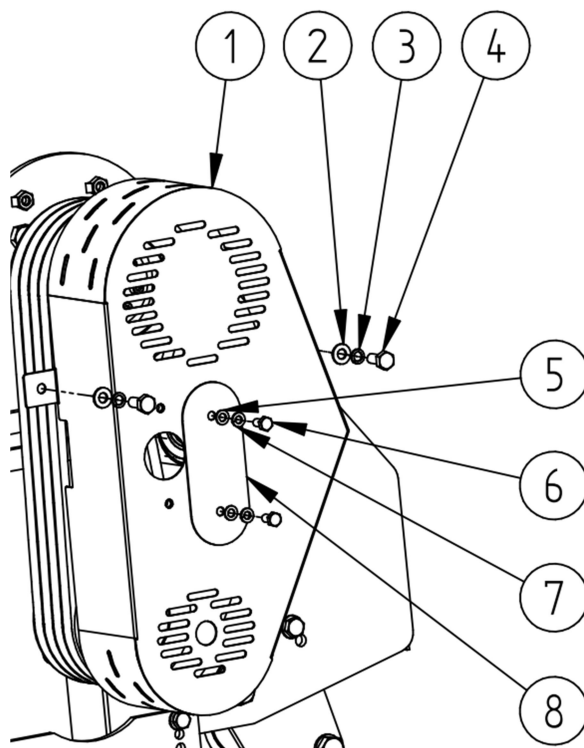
Complete v-belt gearbox cover ECO 180/200/220
